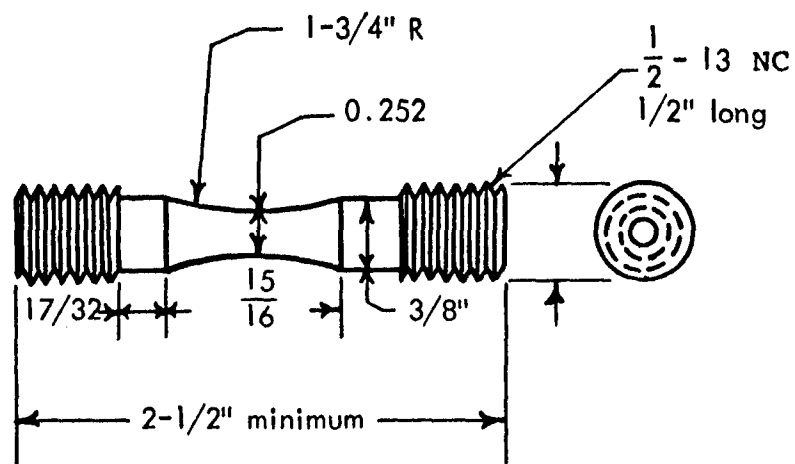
Static Fatigue Radiused Longitudinal Tensile Specimen Engineering Drawing. Note: Specimen Dimensions in Inches.
